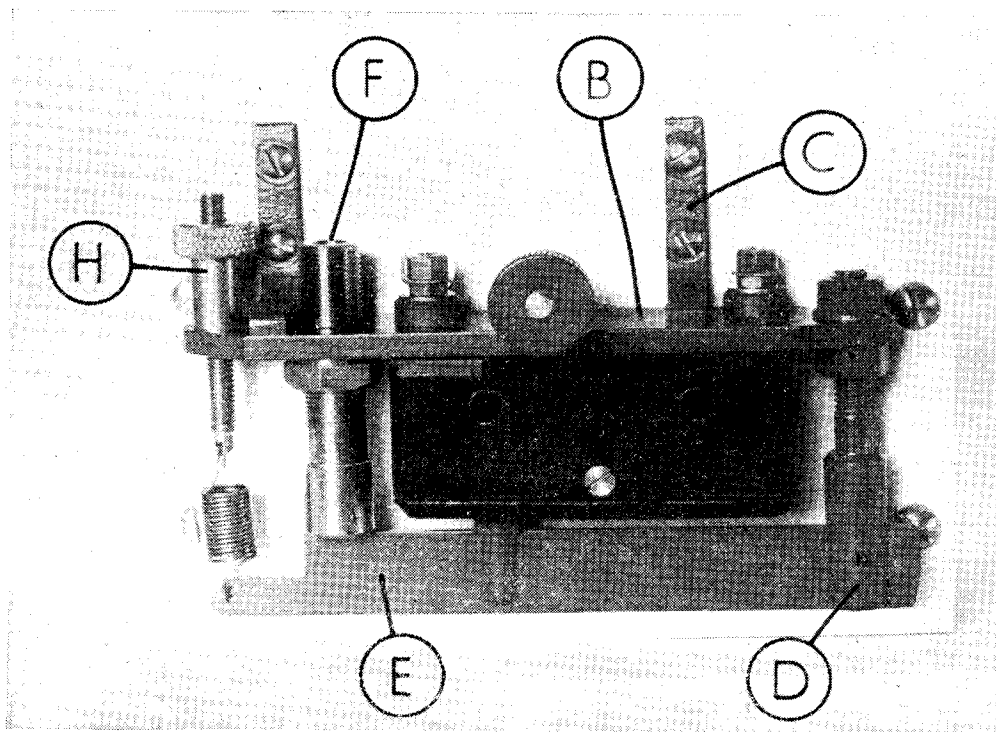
Showing the constructional details. "B"—the bar; "C"—the bar attachment brackets; "D"—the lever pivot; "E"—the operating lever; "F"—the cylinder; "H"—the spring tension adjuster
